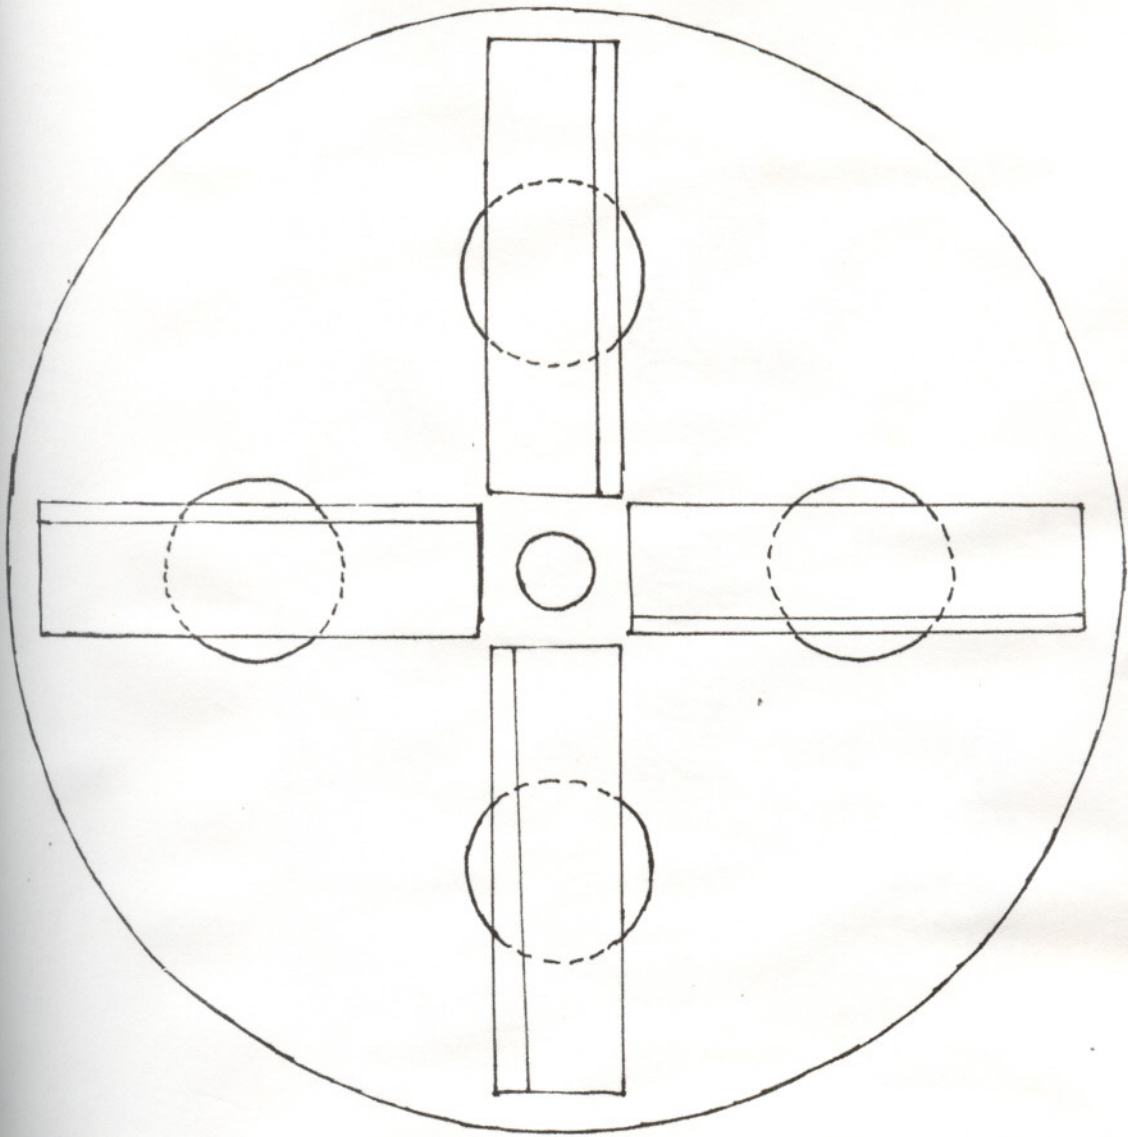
ROTATING DISC WITH BLADE ATTACHMENT
